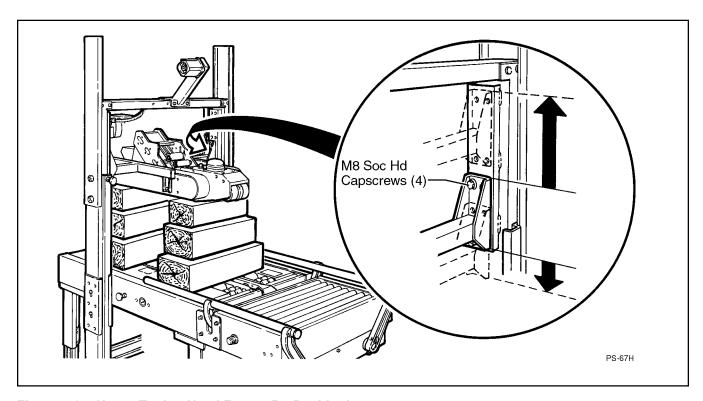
Upper Taping Head Frame, Re-Positioning
